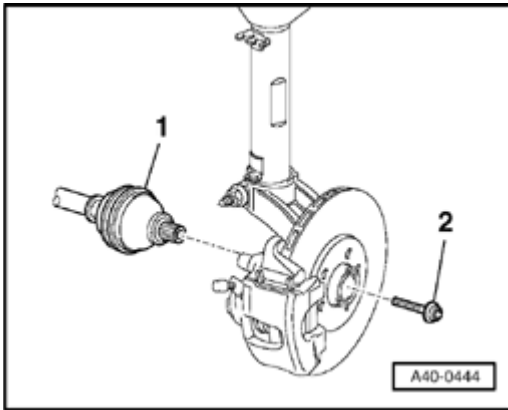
Identifying Collar Bolt For Right Drive Axle
